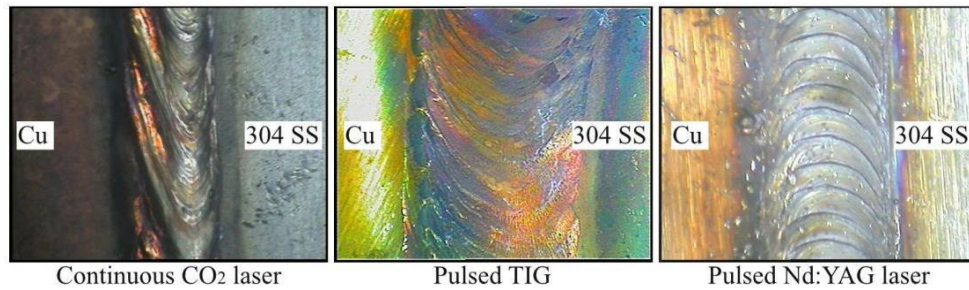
Weld pool top surface for different welding processes.
